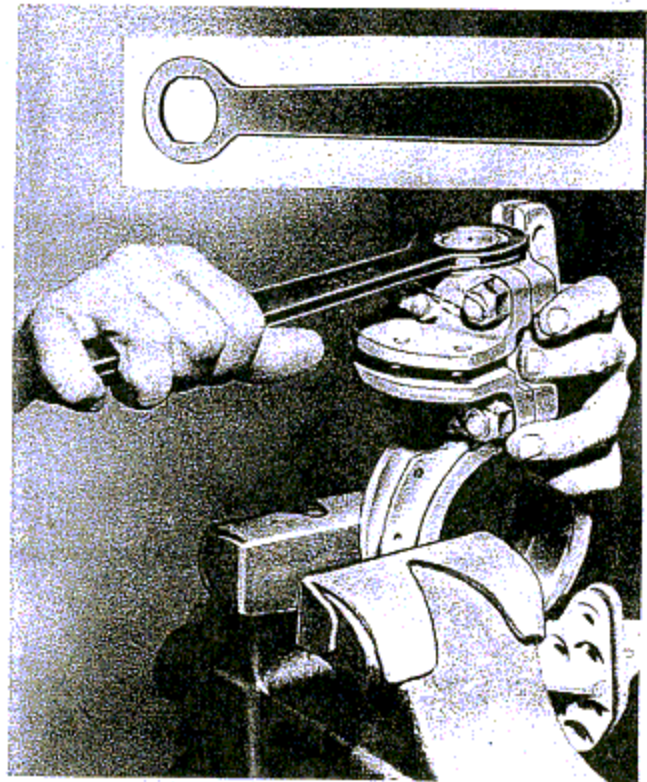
Landing Gear Upper Trunnion Nut Wrench, P-12770
